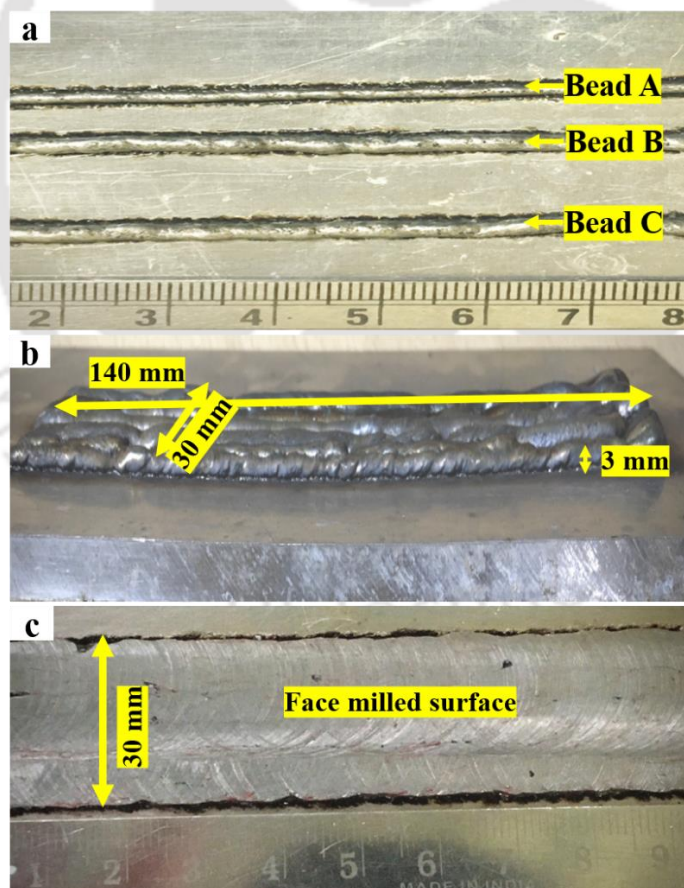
Cladding layer produced by cold metal transfer technology: (a) three types of beads, (b) as-deposited bead Type C and (c) machined bead Type C
